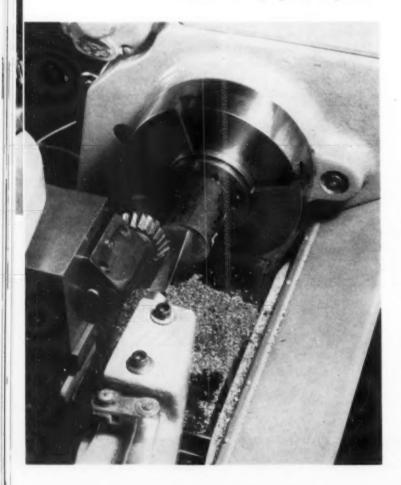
Interpolating tracer controlled milling cutter generates original airfoil master from cylindrical bar stock in specially developed machine.
